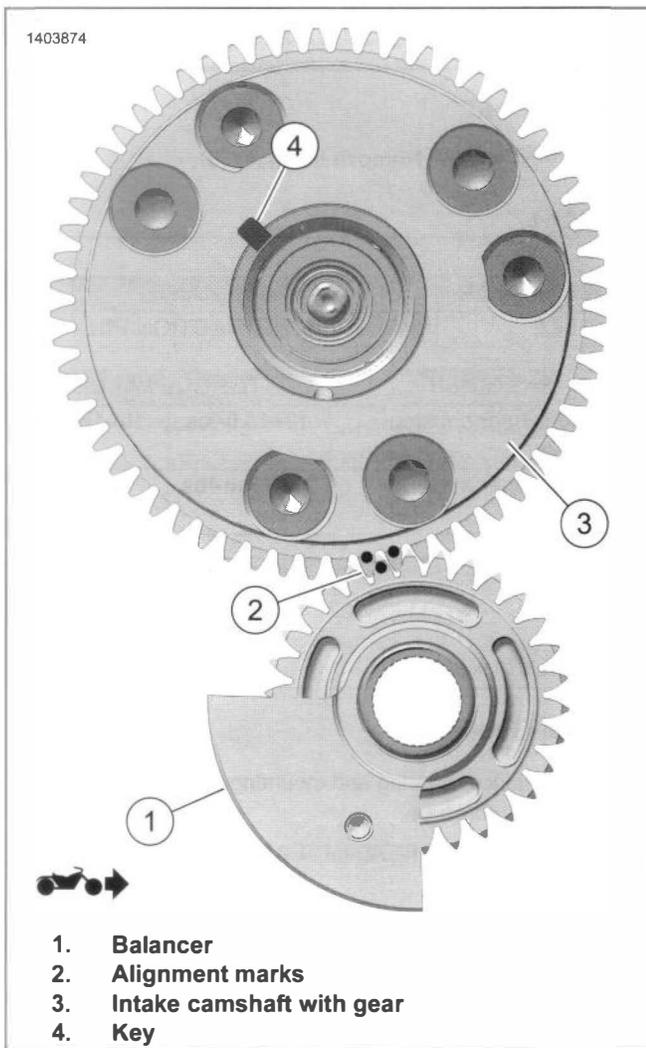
Balance Gear Alignments Marks (Front Cylinder Head Only)
